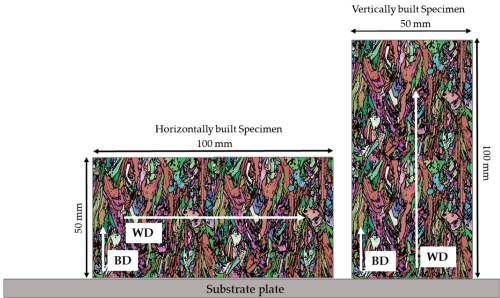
Schematic depicting the geometry and dimensions of the test specimens. Specimen building direction (BD), grain orientation, and welding direction (WD) are also illustrated in the image.
